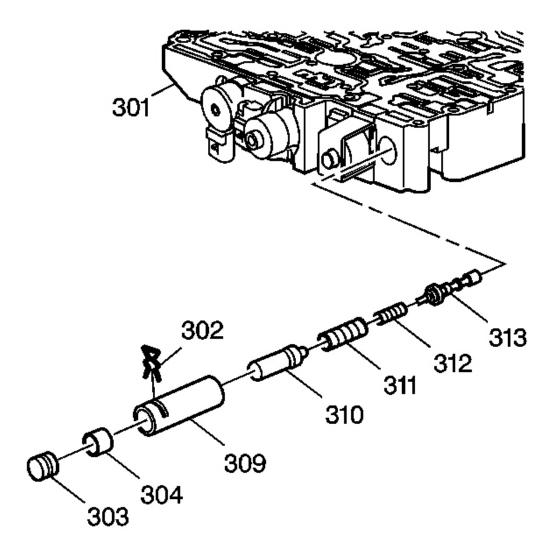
View Of Reverse Boost Valve Bushing Assembly Components Courtesy of GENERAL MOTORS CORP.
